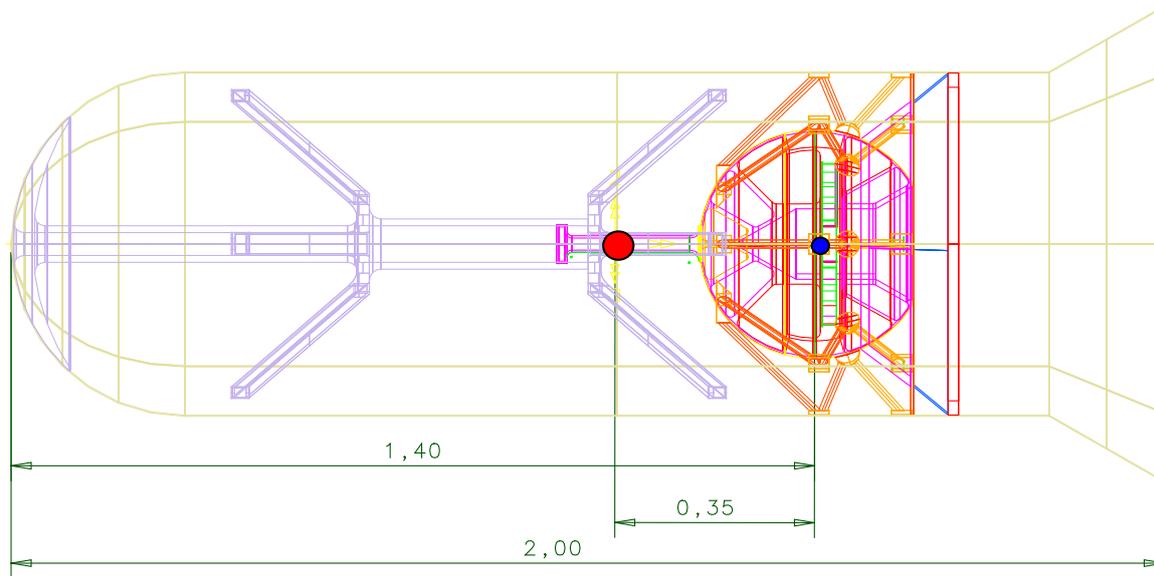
Design drawing of mass optimized capturing mechanism inside the ACCD geometry with major dimensions in [m] [10]
